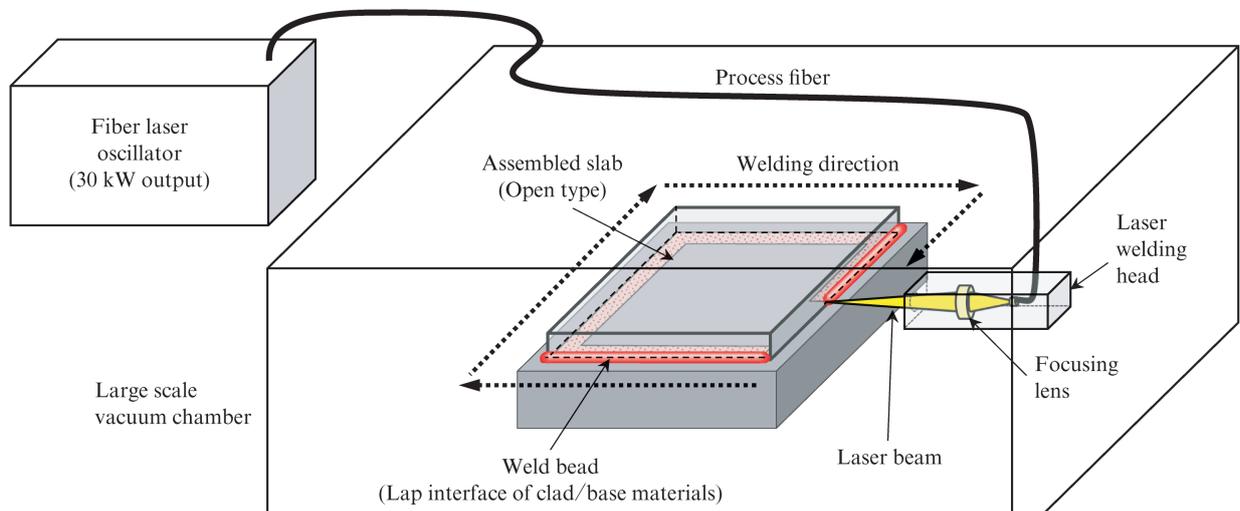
Schematic illustration of vacuum laser welding system for clad slab assembly
